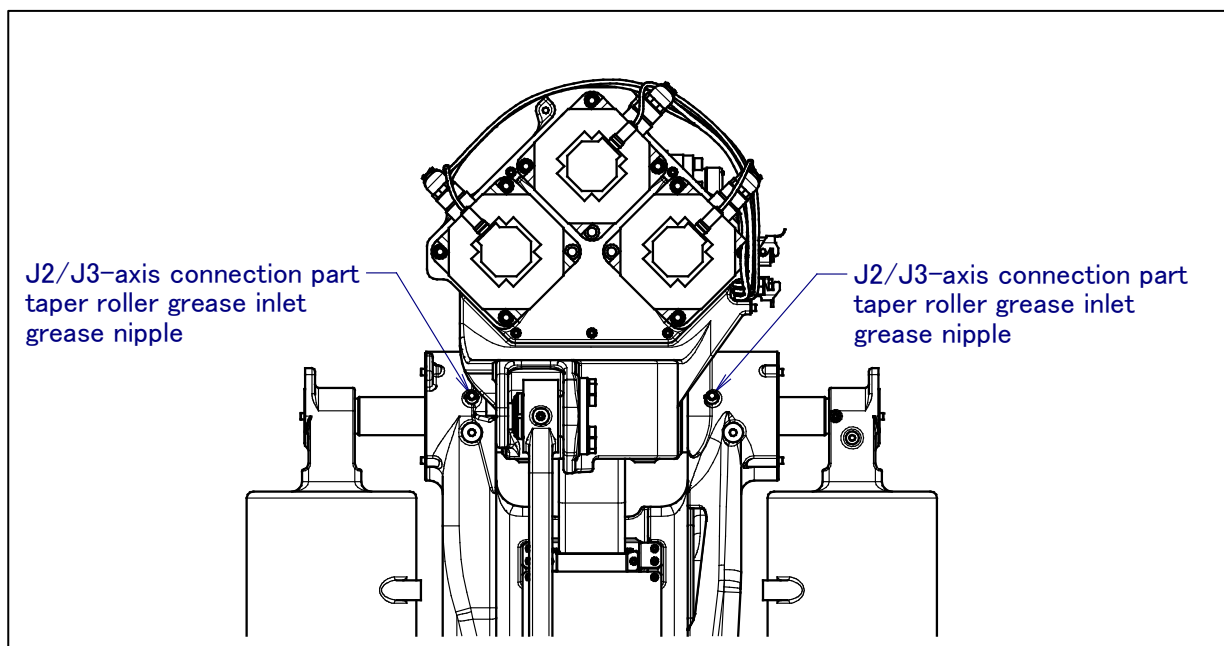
(b) J2/J3-axis connection part taper roller grease supply position
